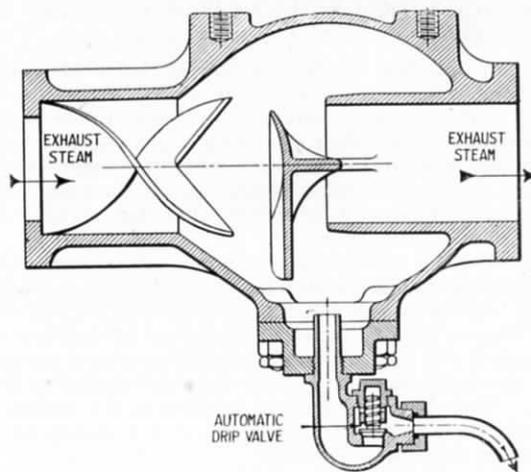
SECTION THROUGH GREASE SEPARATOR AND DRIP VALVE.
